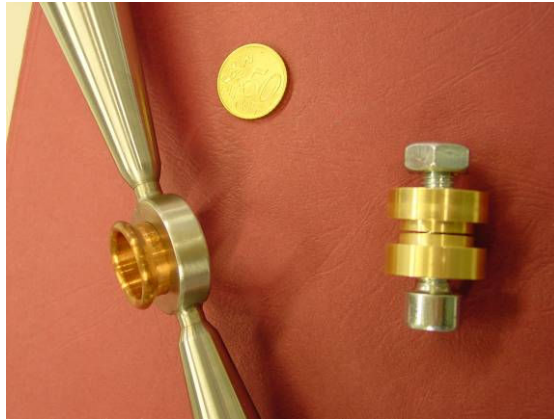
Picture of the stem and the insert that will be press-fitted. On the right side the tool that will be used for the press-fitting operation is shown.
